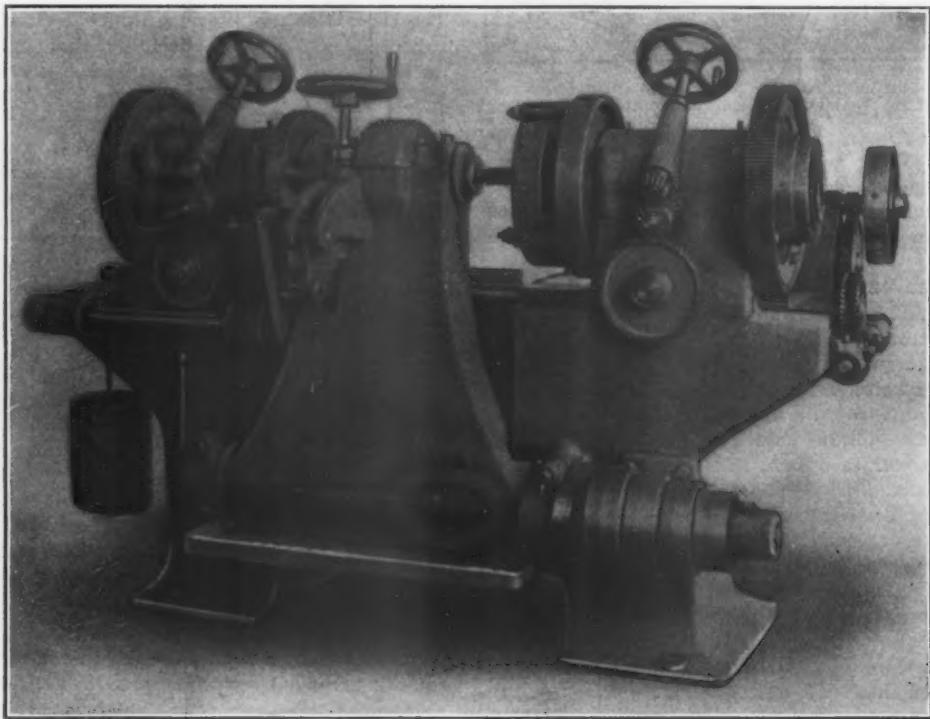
Rear View of the Machine, Showing the Swinging Arm Carrying the Milling Cutter.
